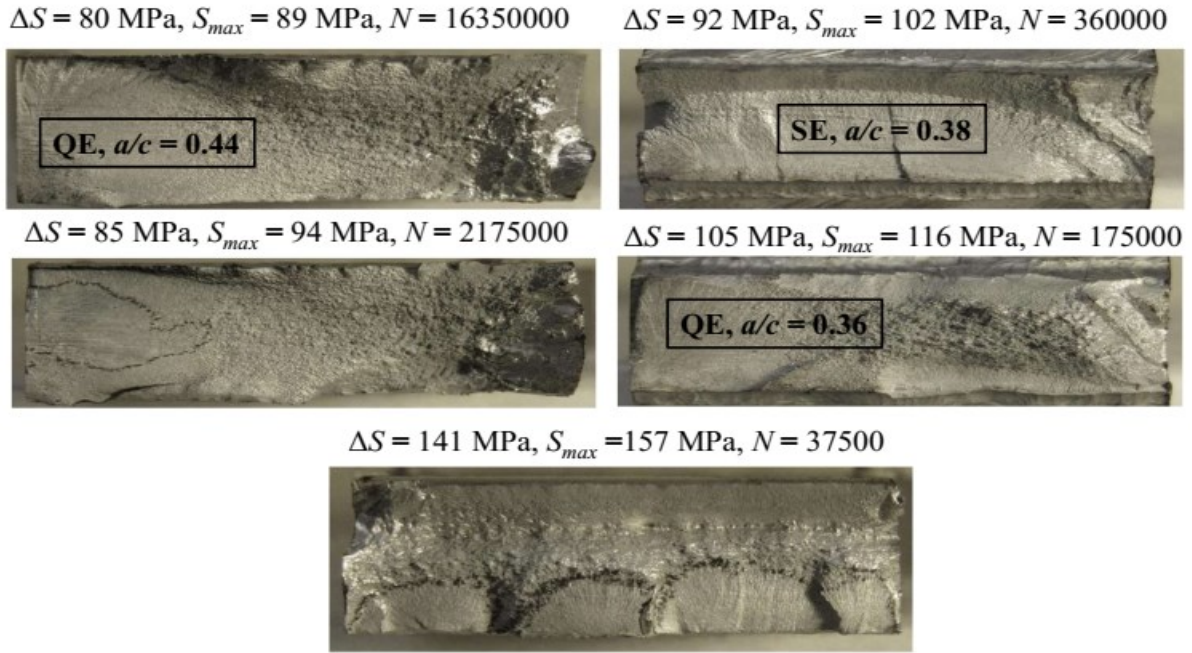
Fracture surfaces for HFMI treated aluminum specimens under CA loading
